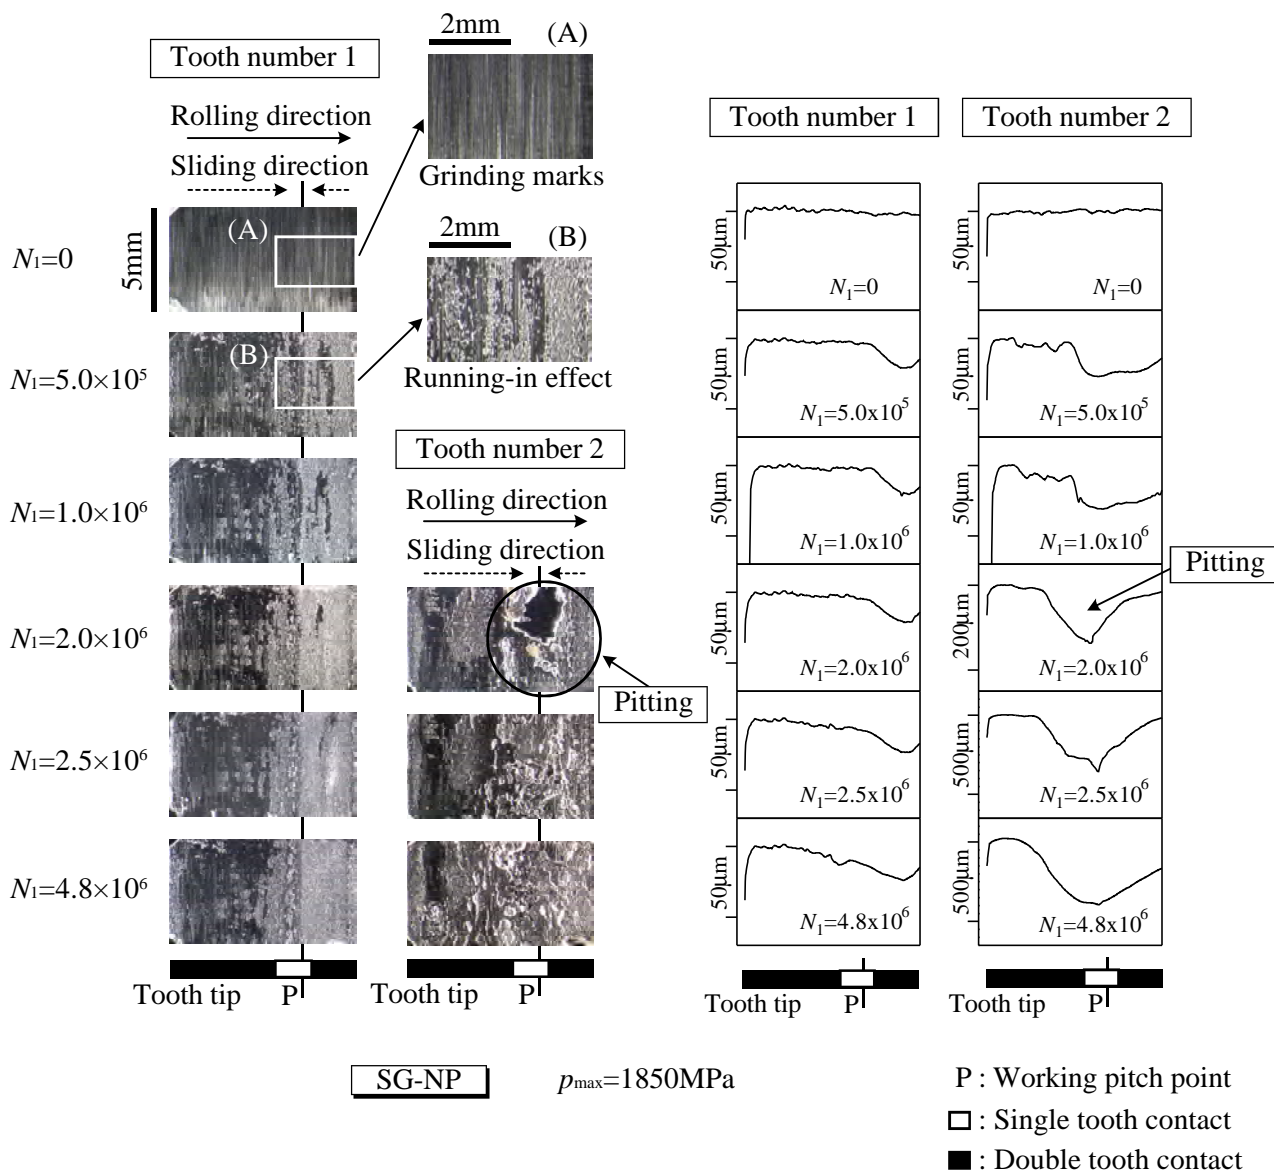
Tooth surface photographs and tooth profiles of failed teeth during fatigue test
